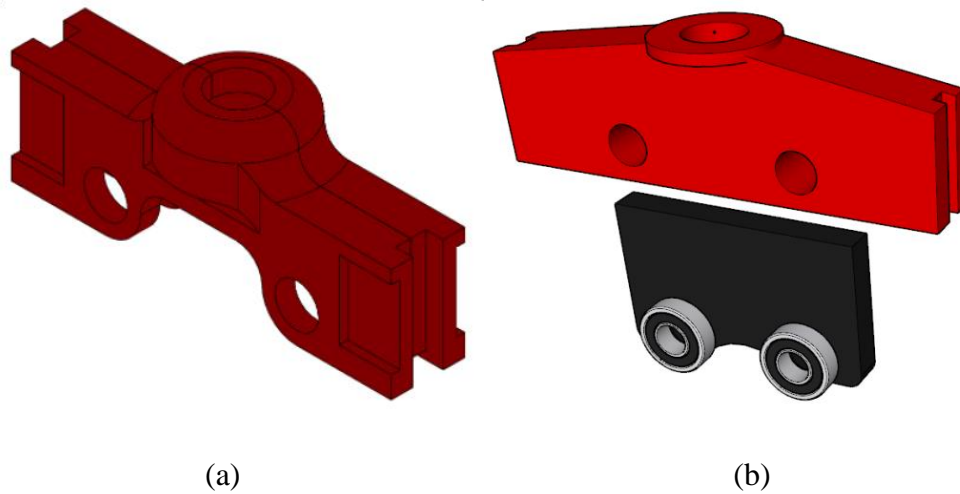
(a) Previous design upper bearing support and (b) fabricated upper bearing support.
